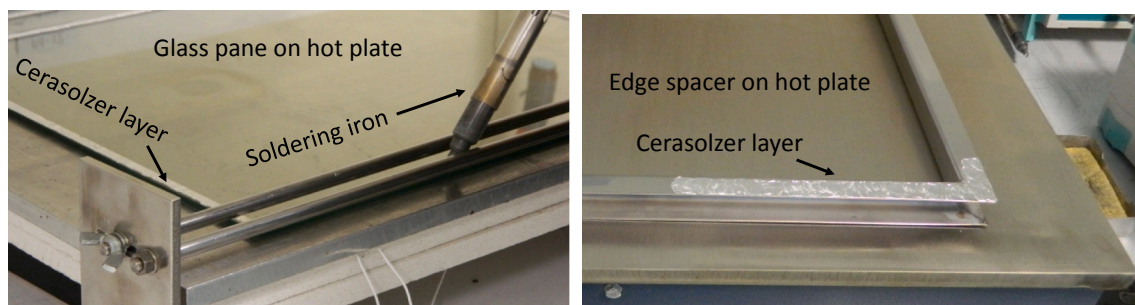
Depositing Cerasolzer 217 around the periphery of collector glass cover and stainless steel spacer.
